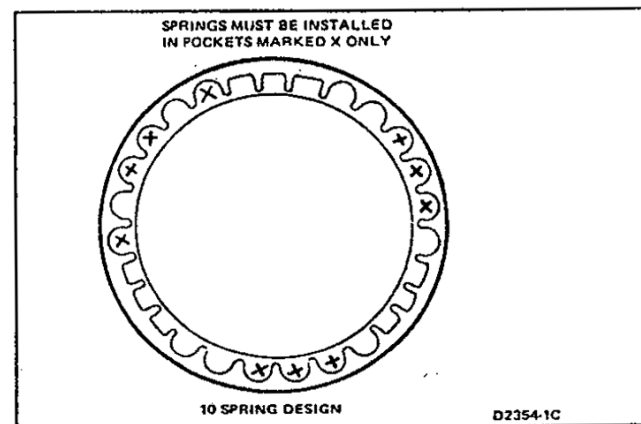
Reverse-High Clutch Piston Return Spring Locations
